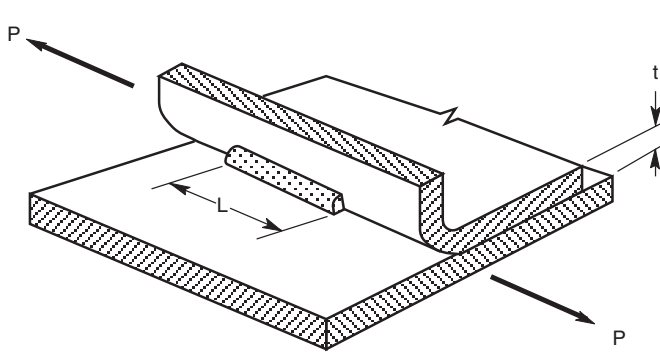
Shear in Flare Bevel Groove Weld
